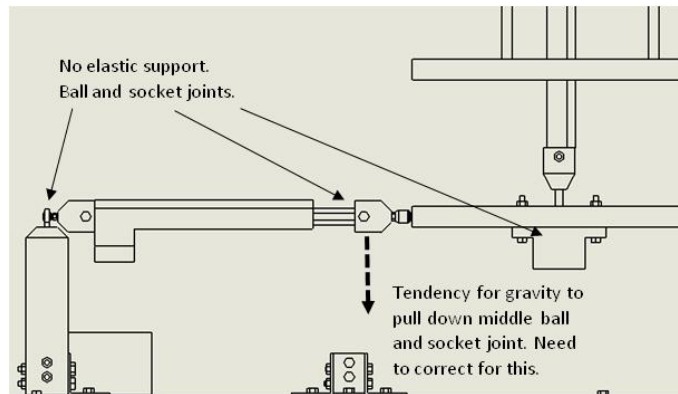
Side view of select assembly parts shows that the three ball and socket joints connected allows system to sink to lowest energy position due to gravity.
